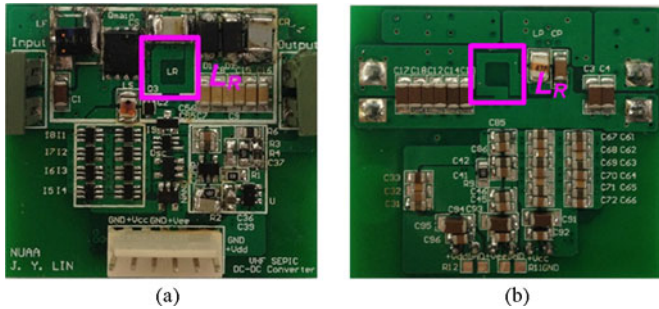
Photo of prototype. (a) Top. (b) Bottom.
